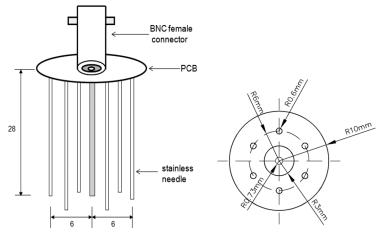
Schematic view of the constructed multifrequency frequency domain reflectometry probe (6-mm diameter), with dimensions in millimeters (PCB is printed circuit board).
